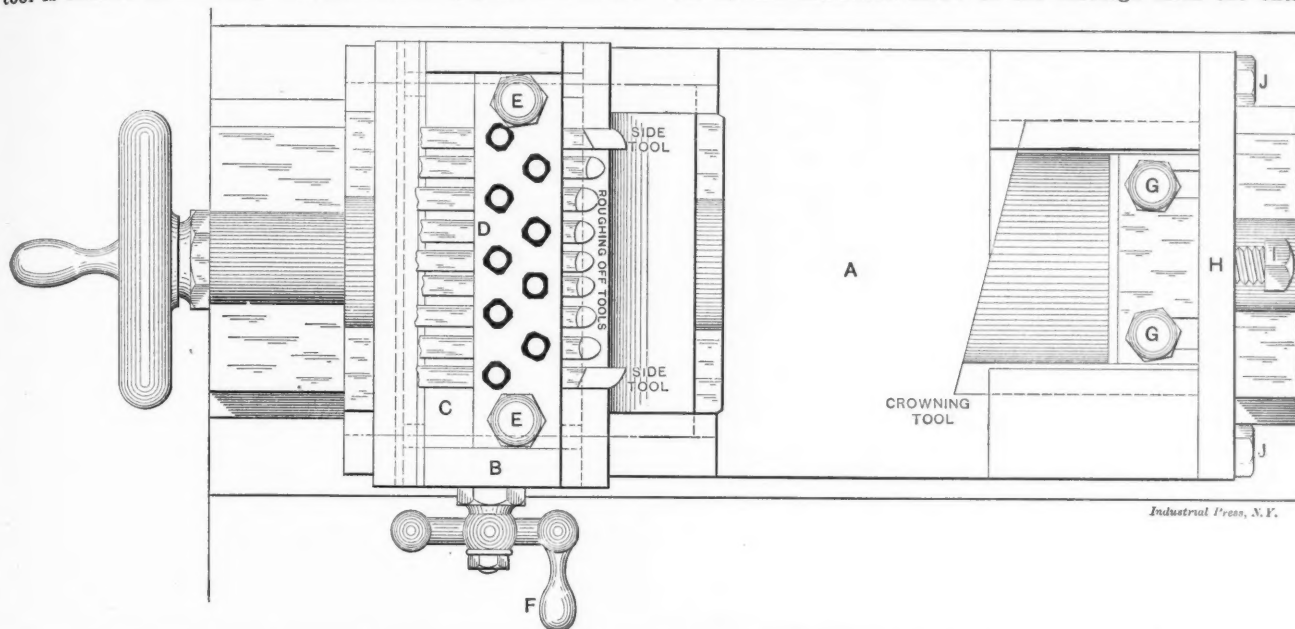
Plan View of Special Compound Slide Rest complete, with Tools in Position for Roughing off the Scale, Finishing the Sides and Crowning the Face of the Pulley.
